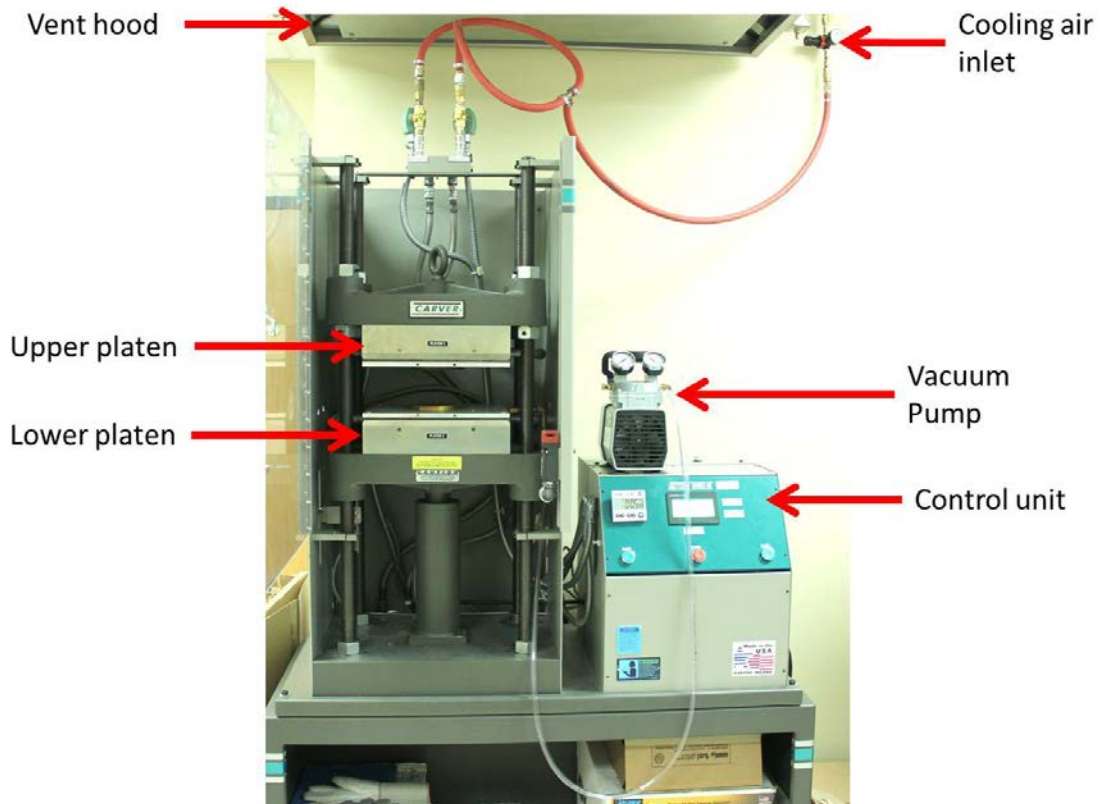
Carver Thermal Press 3893 4NE18 hot embossing machine.
